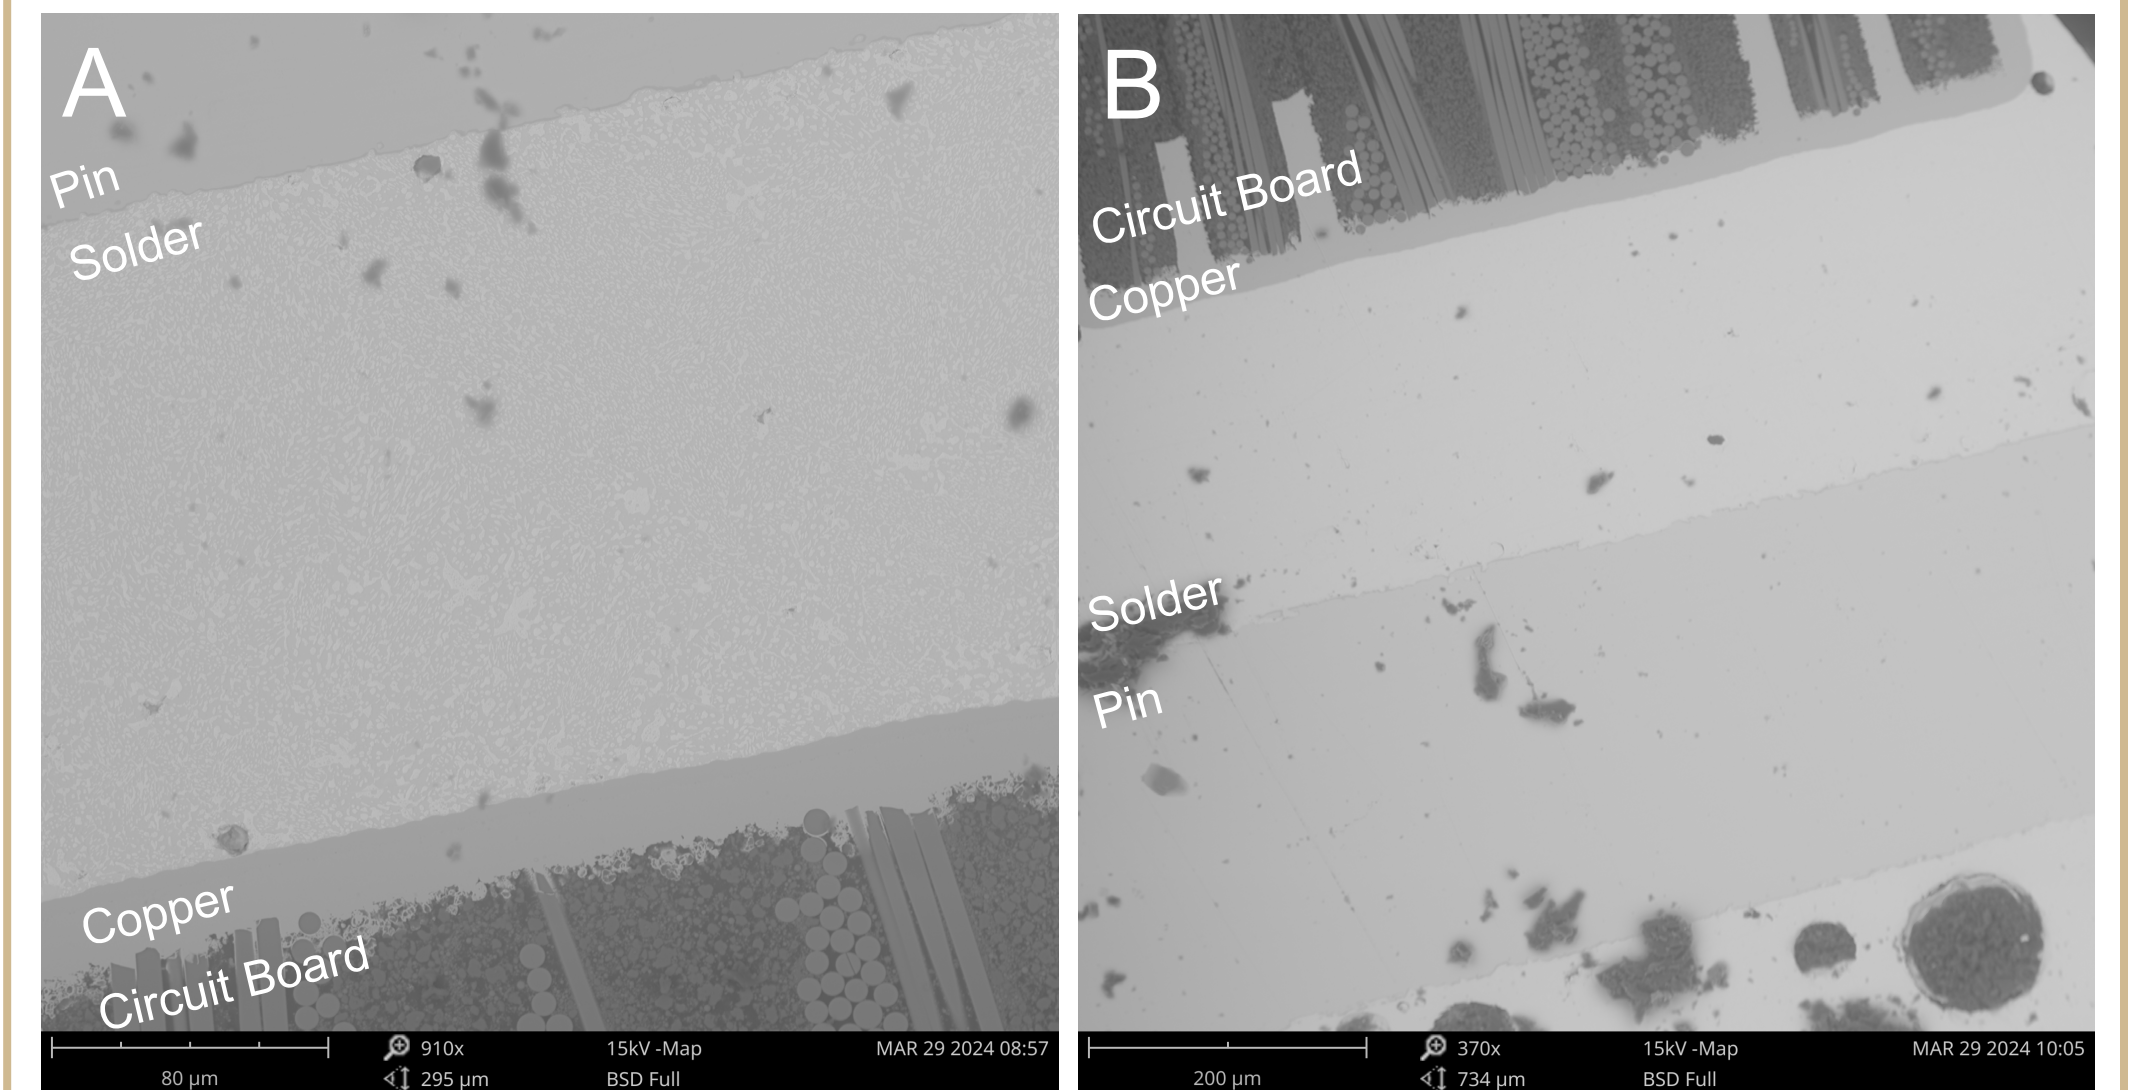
SEM images of solders. Figure 1A shows the leaded solder and Figure 1B shows the SAC305 solder.
